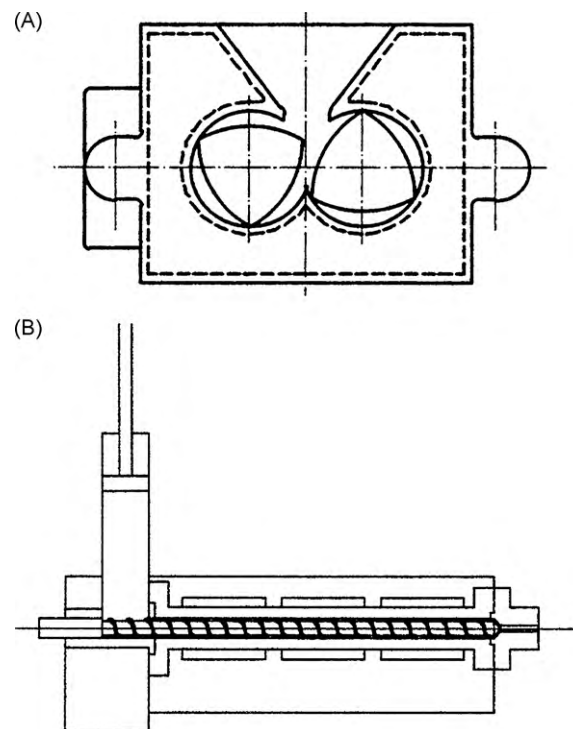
(A) Cross section of the mixing head. (B) Cross section of extrusion head.
